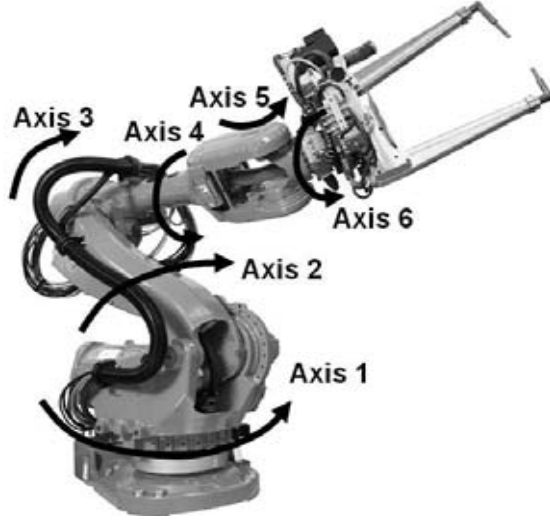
IRB6600 from ABB equipped with a spotwelding gun.
